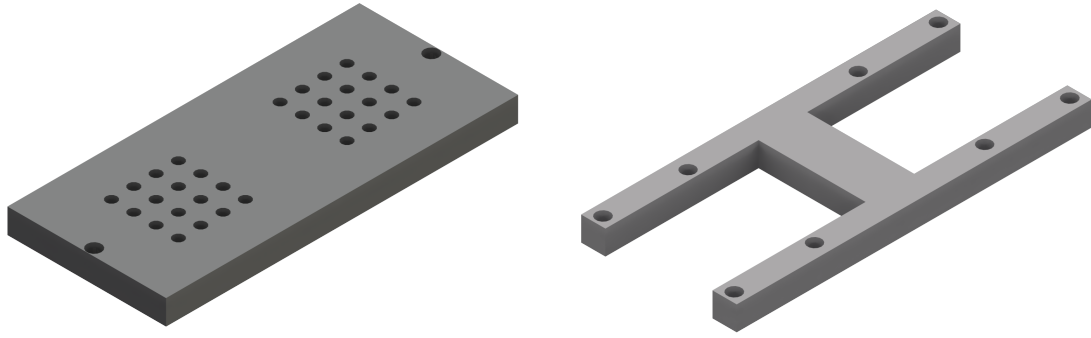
Additional pictures of the second prototype design, left to right: cap for the double-PMT-housing and end-cap for this housing.
